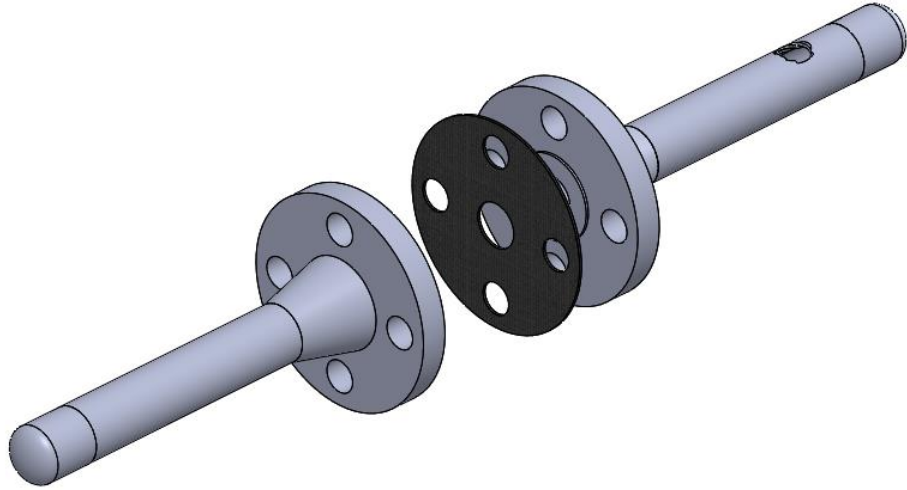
3D drawing of flange, with pipe and gasket from Pro-Flange Ltd.
